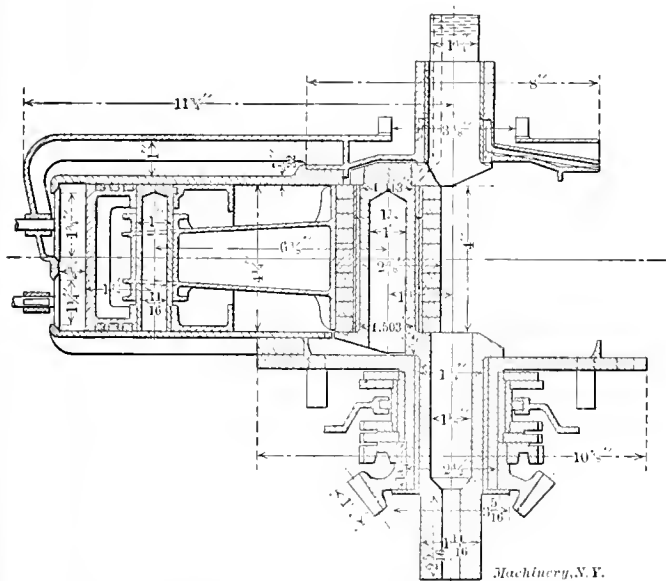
Vertical Section through a Cylinder and the Crank-shaft, showing Method of attaching Connecting-rods to the Crank-pin.
